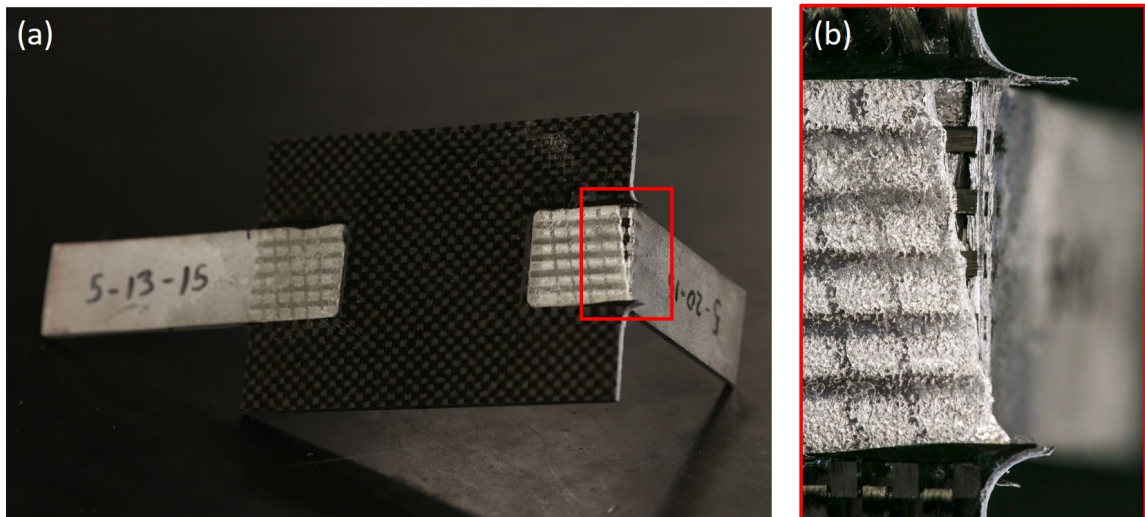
(a) Failed five layer three-point-bend specimen. (b) Detail of aluminum tab failure.
